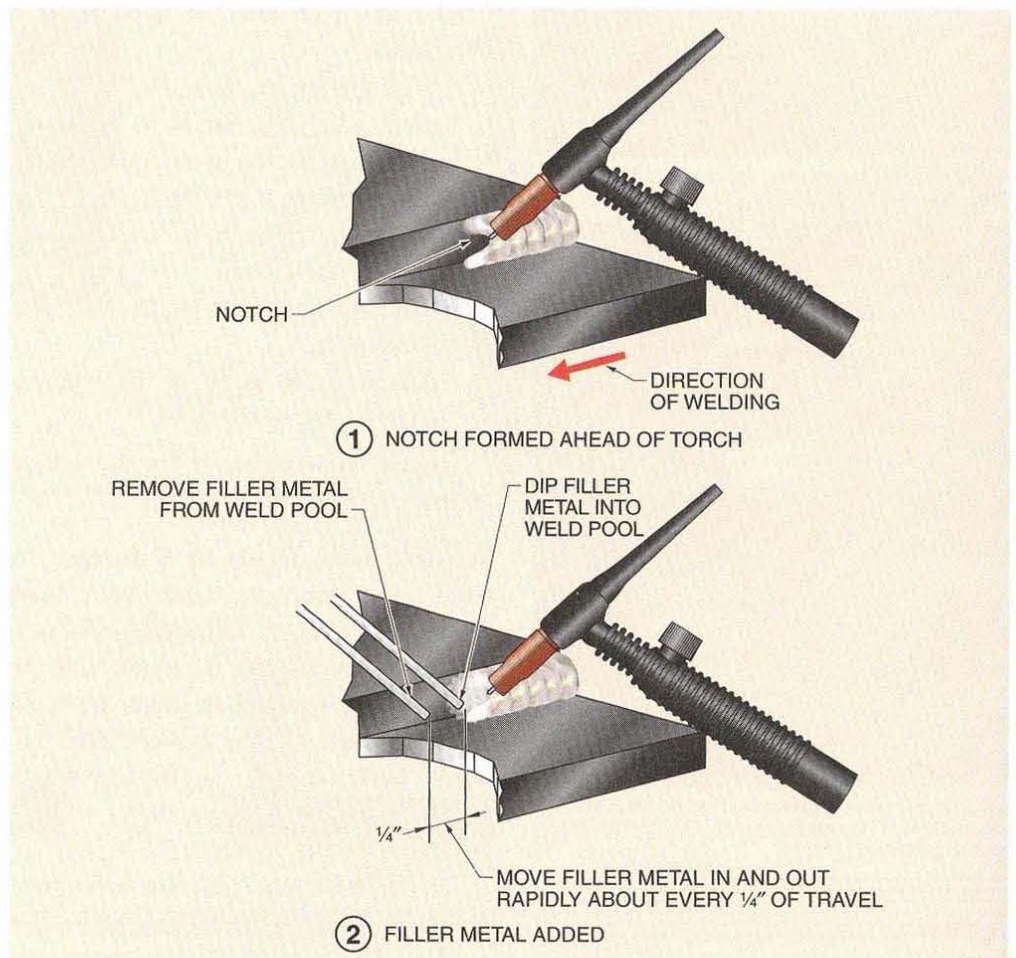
Advance the torch so that the notch in the weld bead continues to form ahead of the torch.
